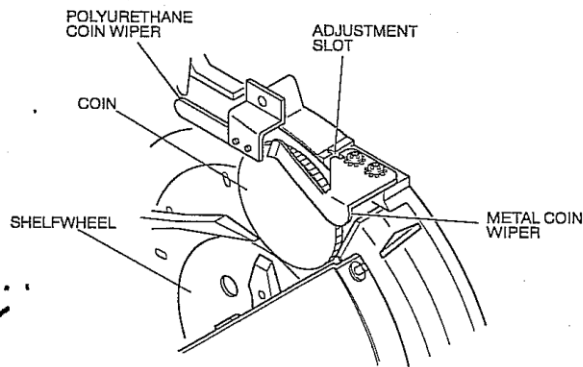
Hopper Metal Coin Wiper Adjustment – Large Coin.
